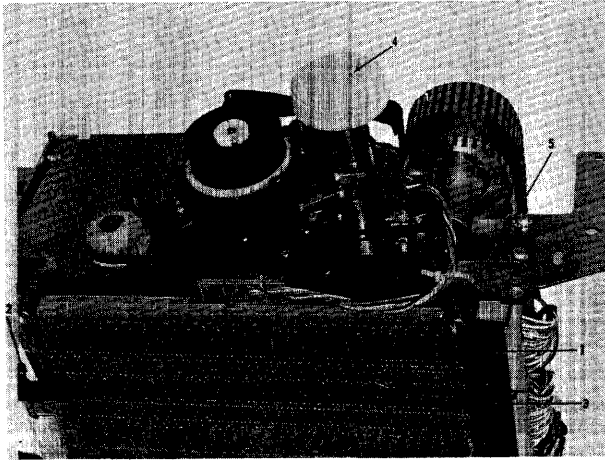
Frame Assembly for TermiNet 300 C Printer (Bottom View)
